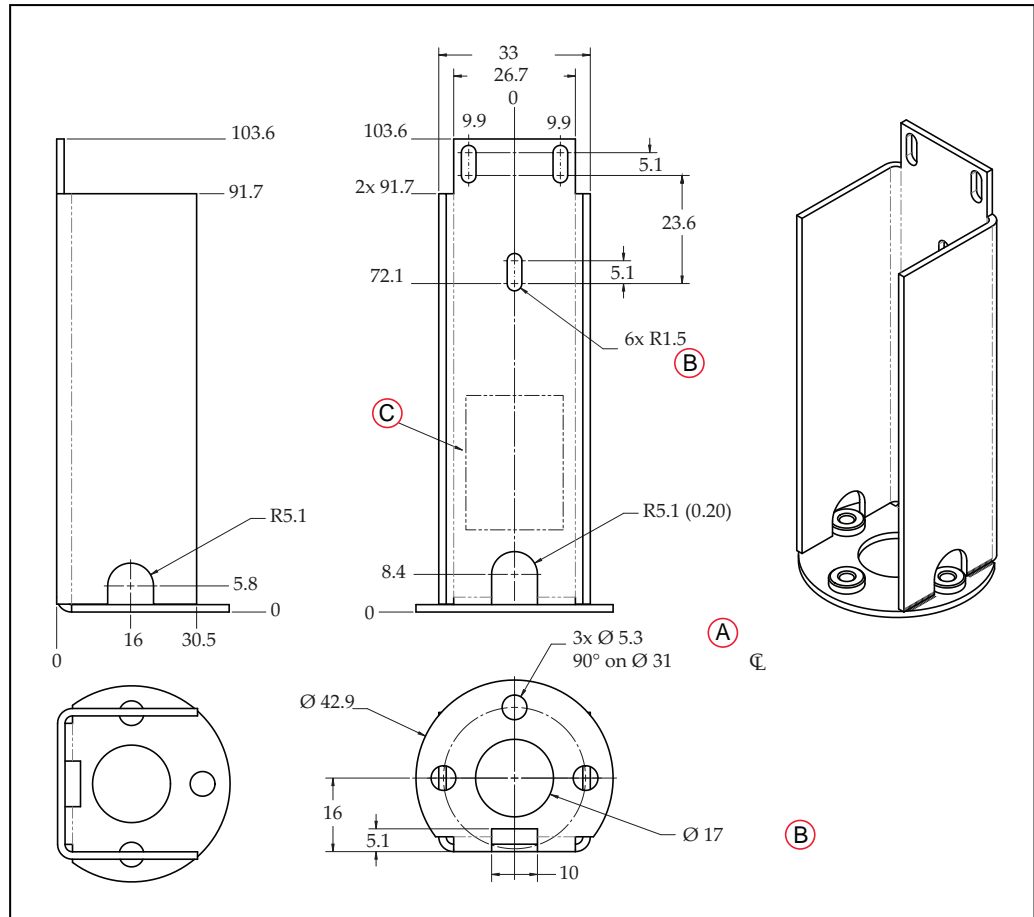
Dimensional Drawing of Camera Bracket, (A) Through Holes Equally Spaced at, (B) Through Hole, and (C) Label on Back (units are mm)
